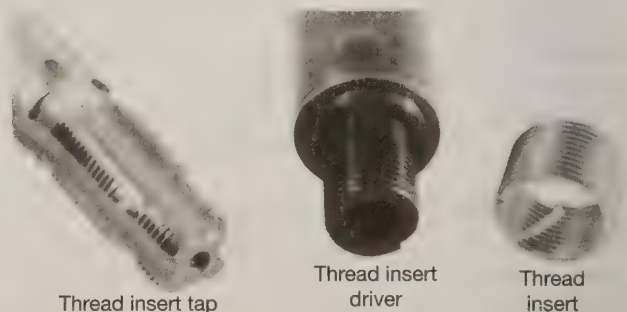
Thread insert tap, driver, and repair insert for spark plug hole repair.
